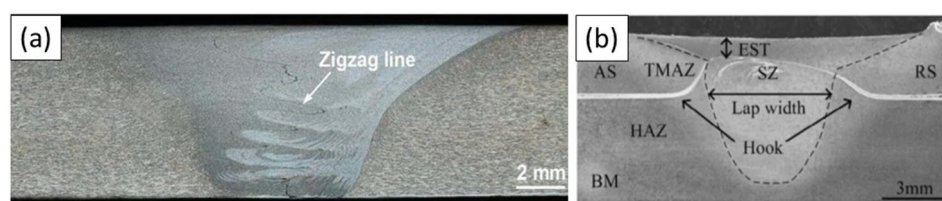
Geometry of (a) zigzag line [146] and (b) hook defects in the joints [156].
